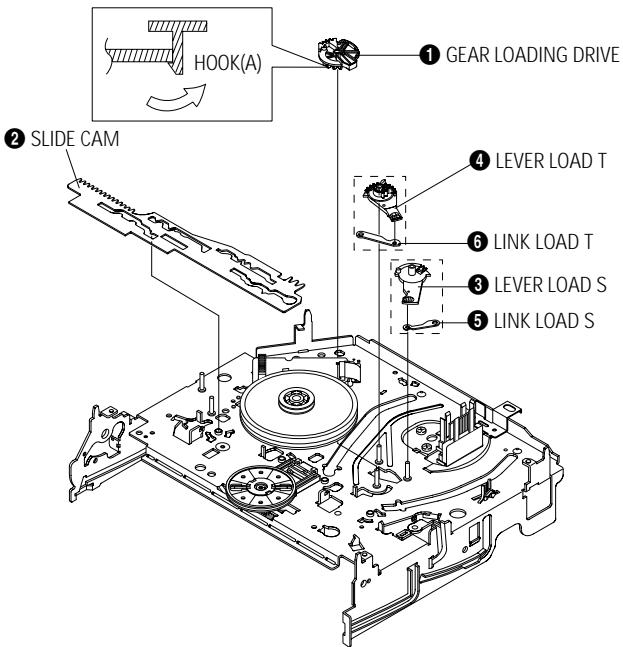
Gear Loading Drive, Slider Cam, Lever T, S Load Ass'y Removal
